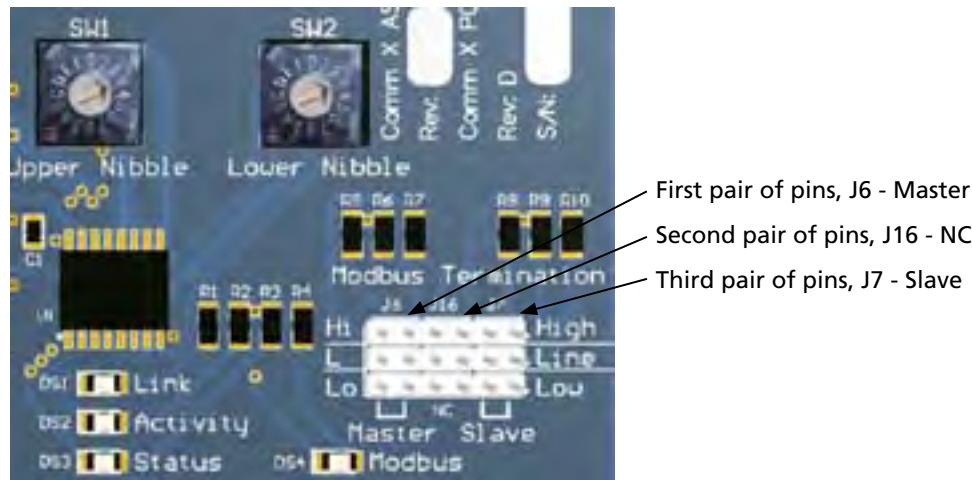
Location of Jumpers J6, J16 and J7 on the Comm X PCB
